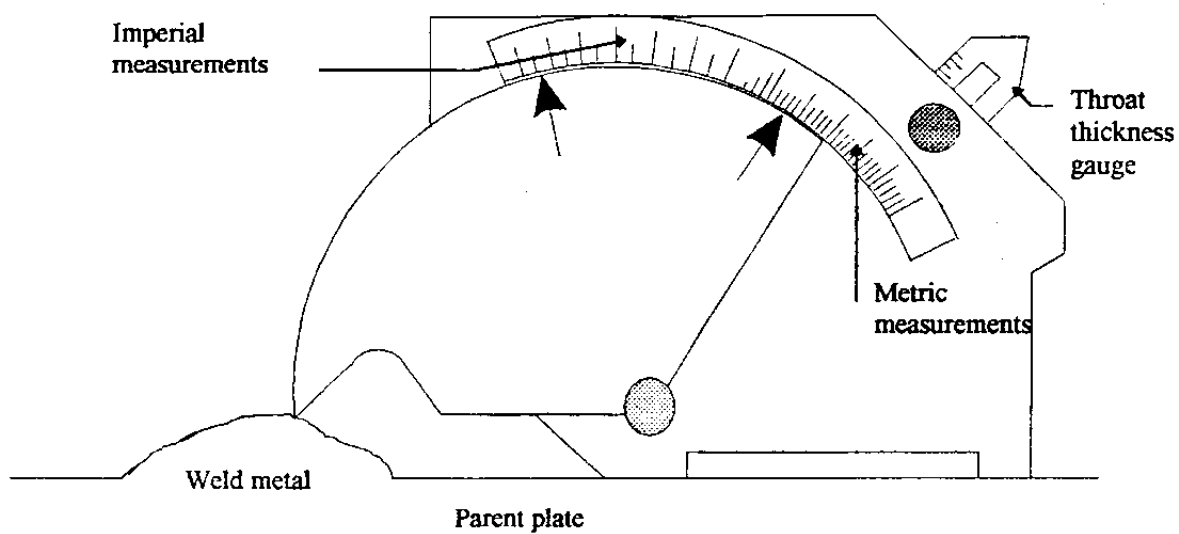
Welding Institute gauge measuring Excess weld metal
